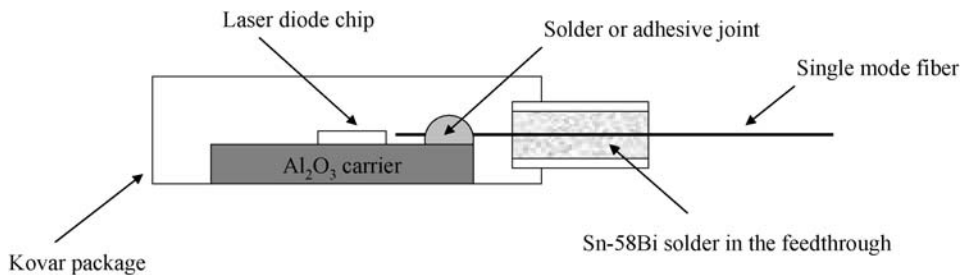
Assembly configuration used in the calculation of the creep in a solder and adhesive joint. The optical fiber is soldered or adhesively bonded on the laser carrier and is subsequently soldered in the fiber feedthrough with a bismuth-based solder.
